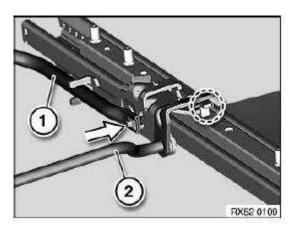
Removing Seat Rail From Adjusting Bracket Courtesy of BMW OF NORTH AMERICA, INC.
